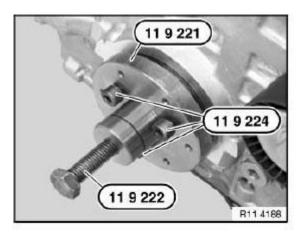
Tightening Screws Using Special Tool (11 9 224) Courtesy of BMW OF NORTH AMERICA, INC.
